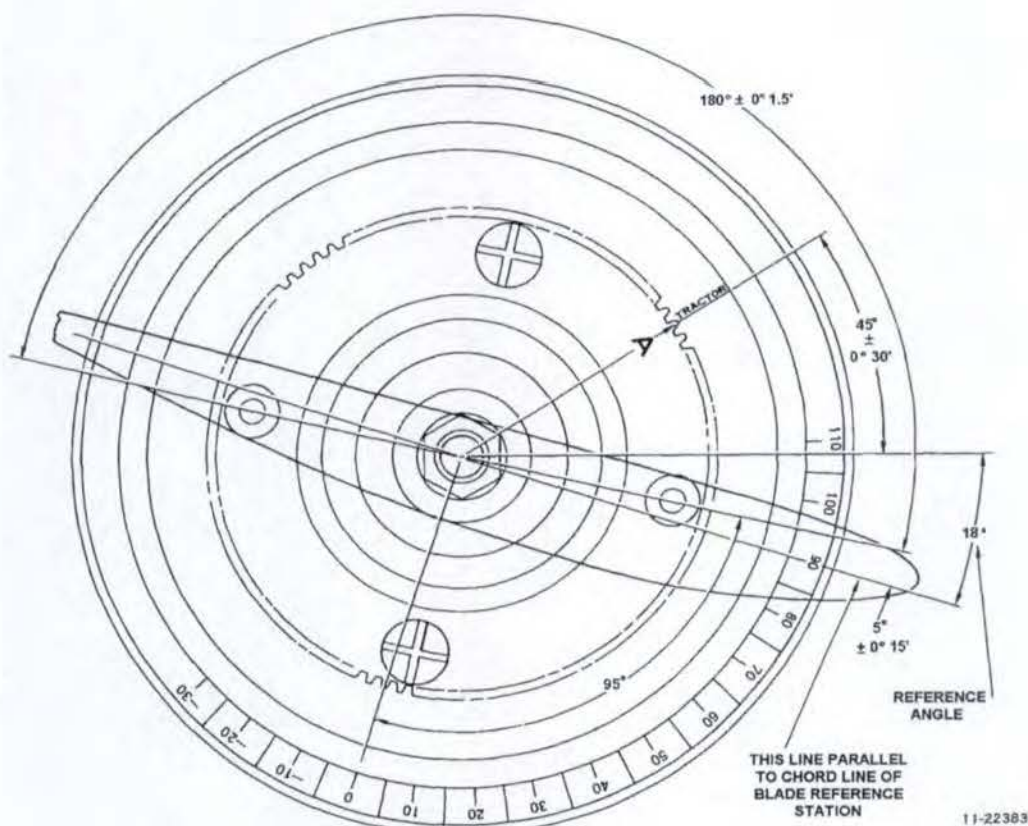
Blade Butt Face Markings on 7111 Blade Assembly
